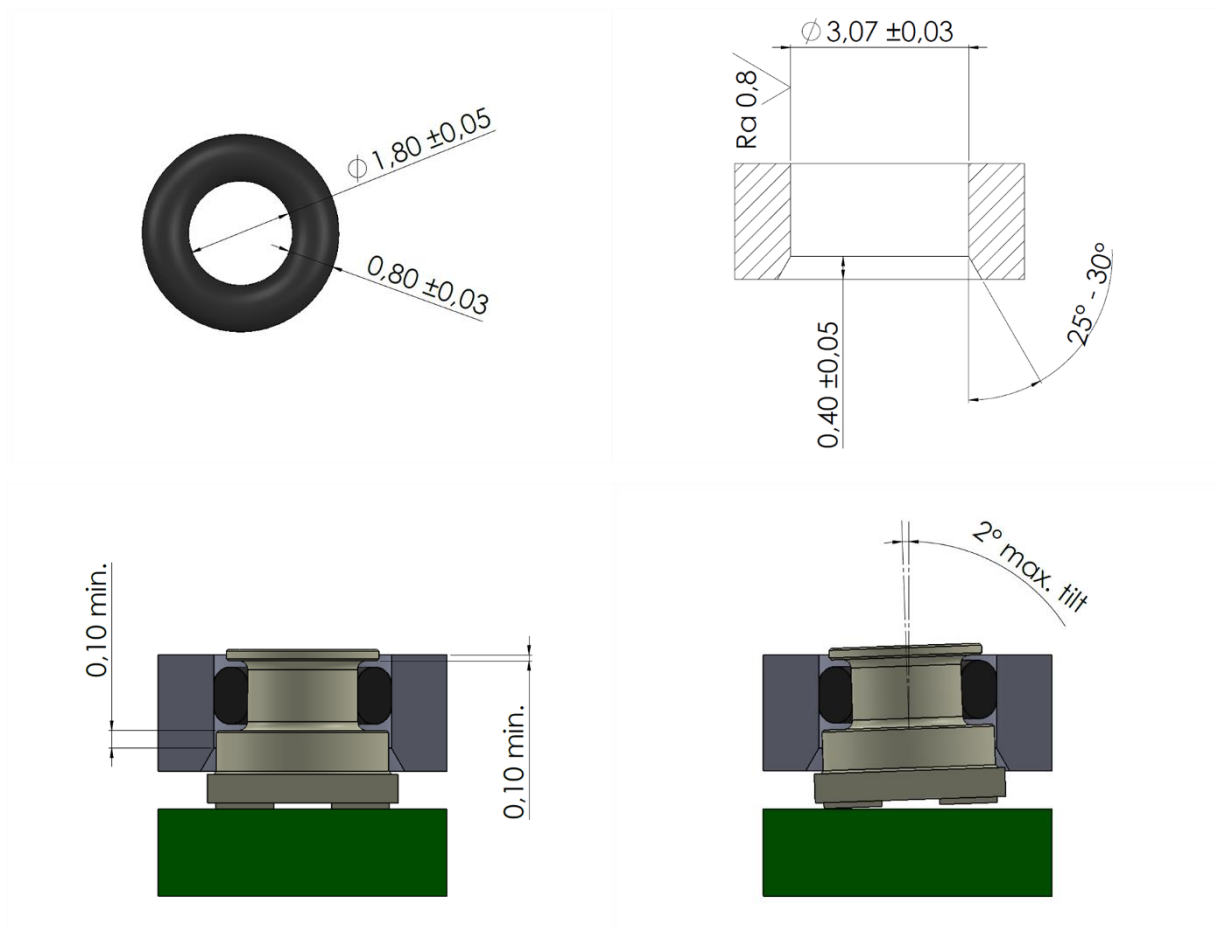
The prescribed dimensions and tolerances of seal and receptacle hole for pressure sensor TE Connectivity MS5837-30BA. [38]
